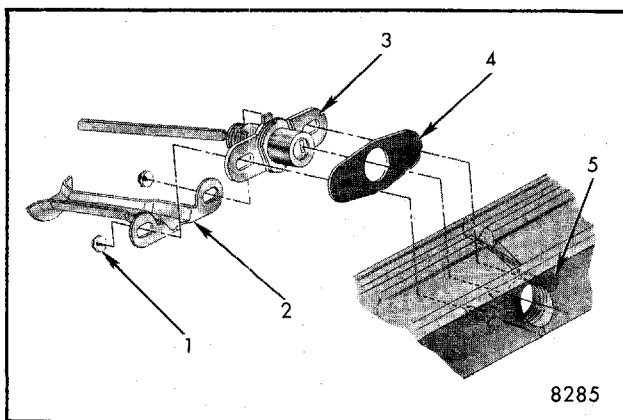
Rear Compartment Lid Lock Cylinder - Chevrolet "F" Styles
